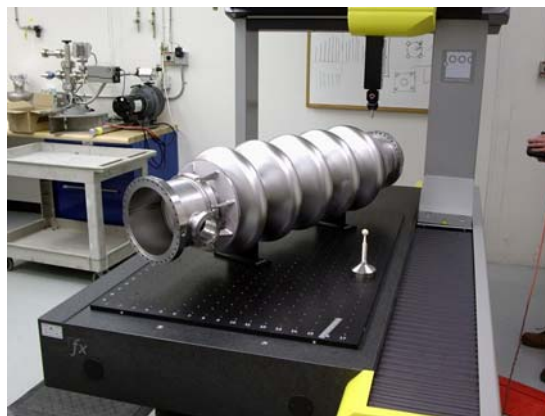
Dimensional Analysis on the CMM machine, the cavity needed to be placed on an angle due to its size.
